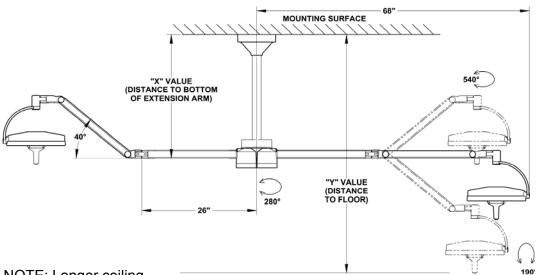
Single Ceiling Mount Ceiling Rod Calculation
